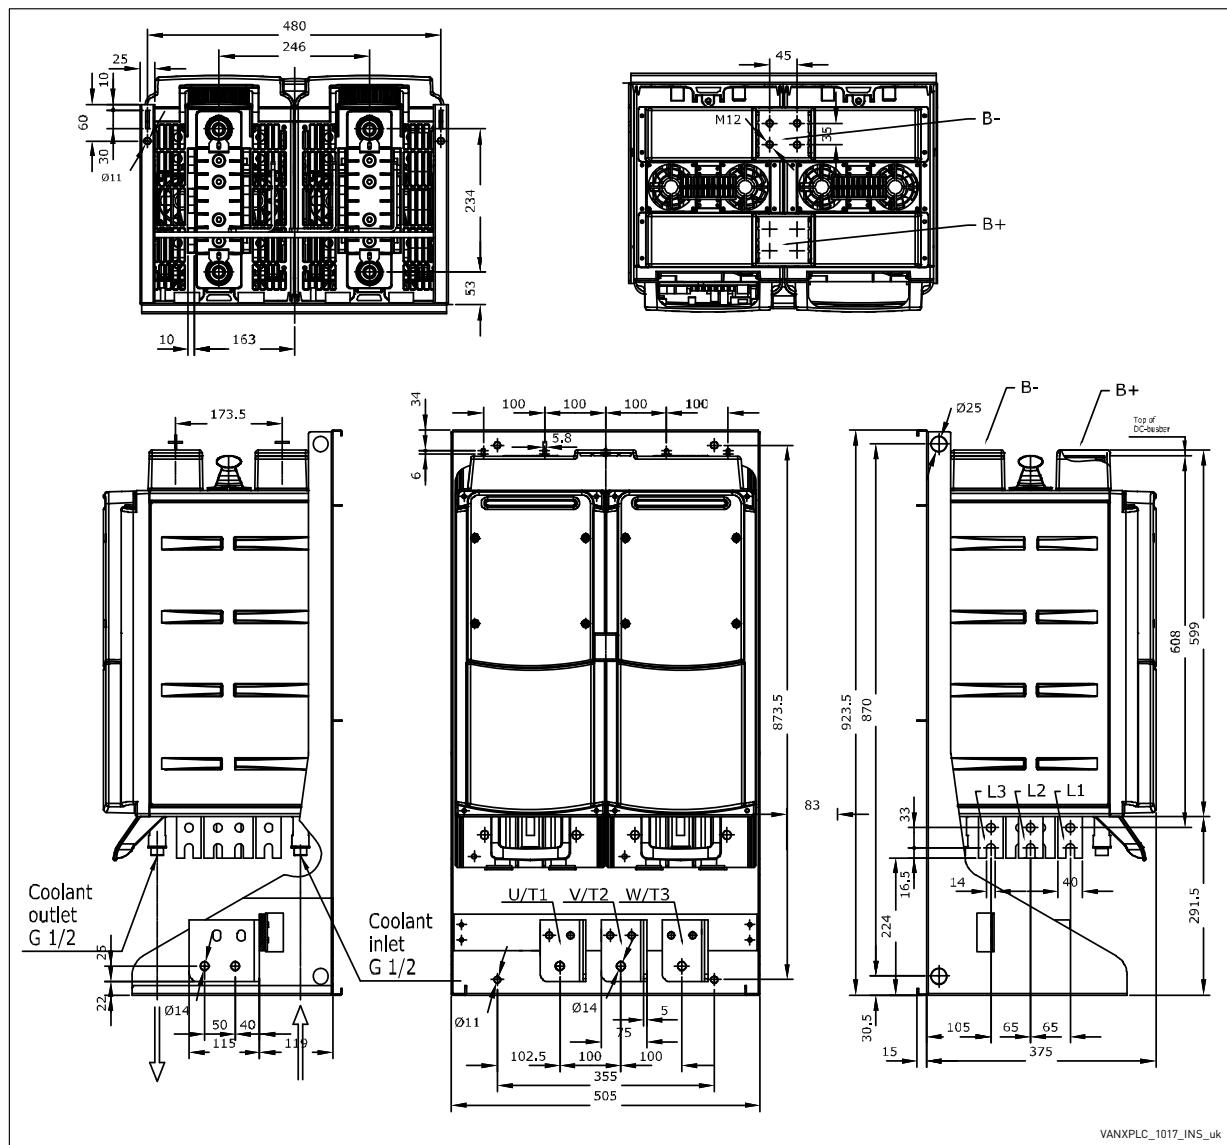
Vacon Liquid-Cooled frequency converter with mounting bracket, CH63
